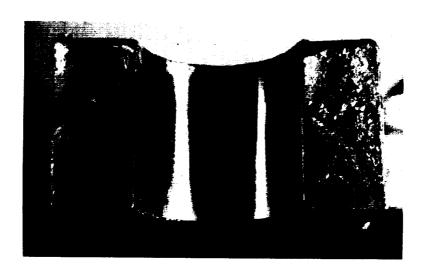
Appearance of the fracture in the failed fitting shown in figure 8.  $\times$  2.
